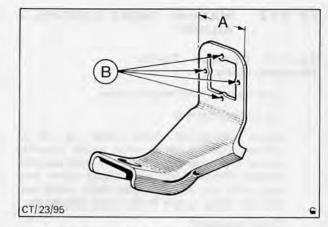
Accelerator cable remover Dimension A – 25 mm (1.0 in)
